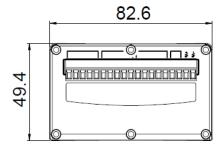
WISE-S600T Series I/O Module Dimensions
